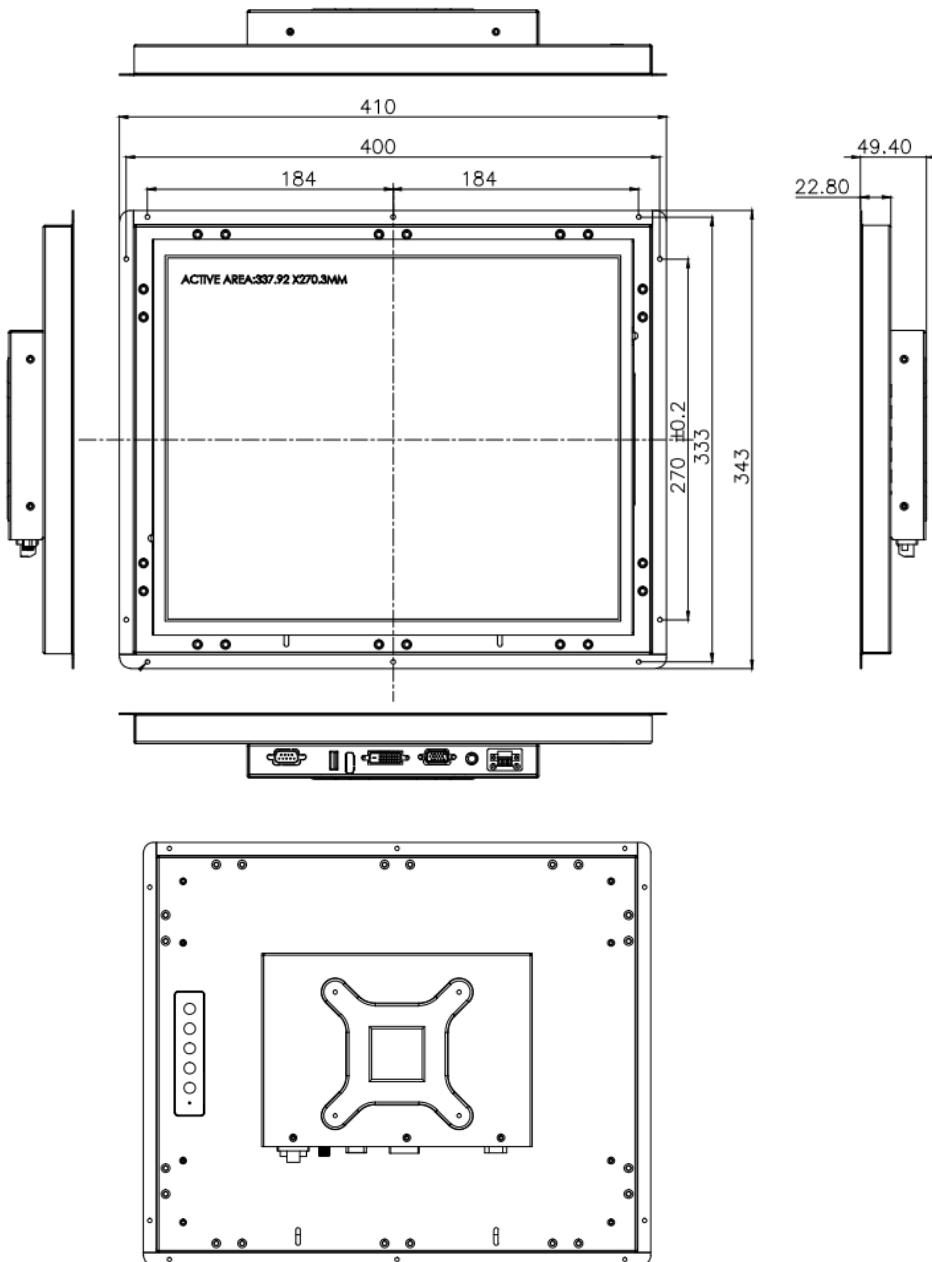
LCD-KIT-F-17A Physical Dimensions (millimeters)
